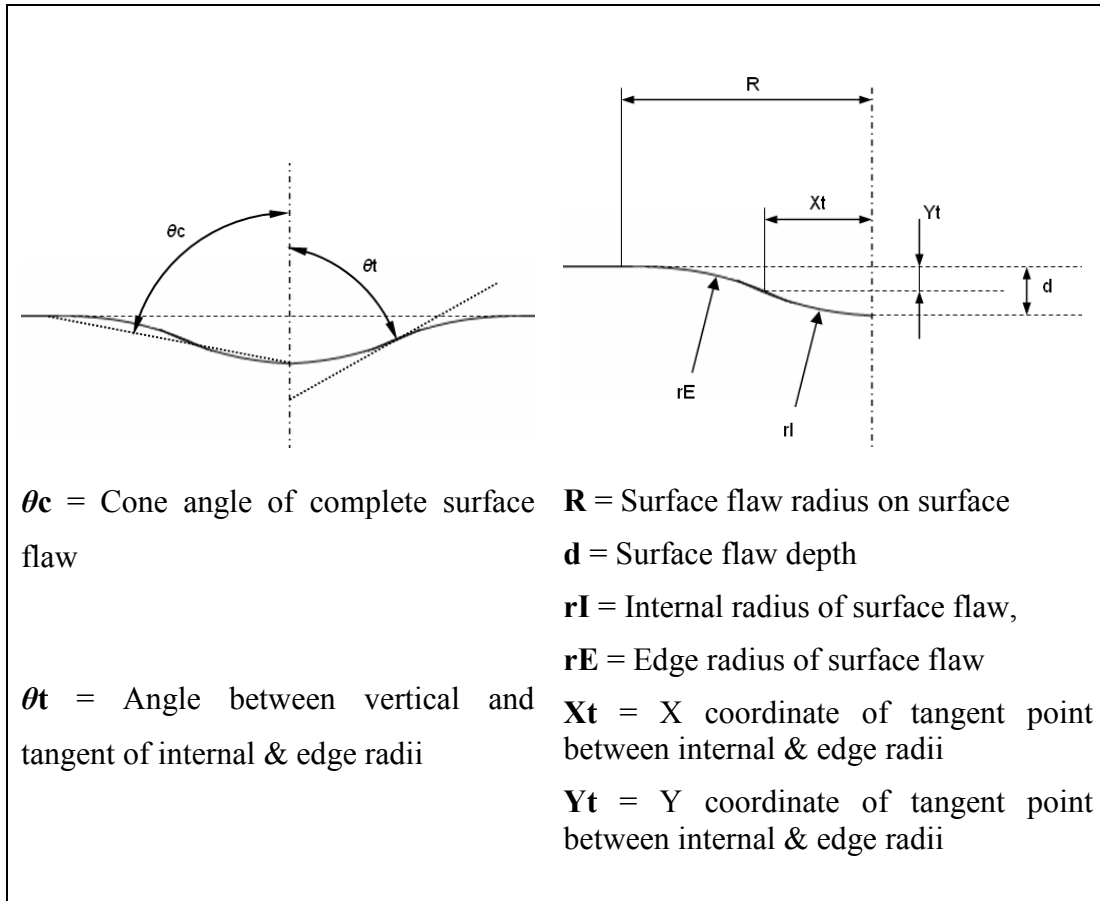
Geometric variables used to reconstruct a surface flaw section
